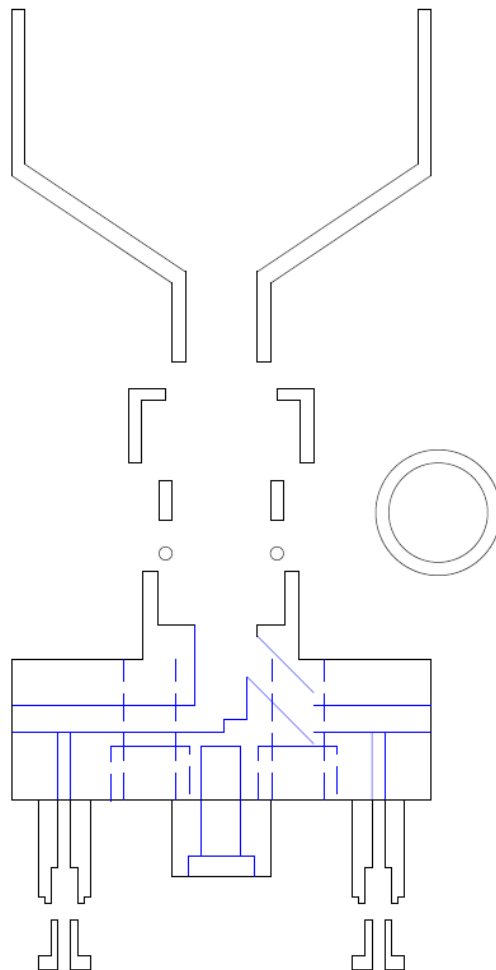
Cross sectional exploded view of the fluid collection funnel and translation manifold with the impactor probe removed.
